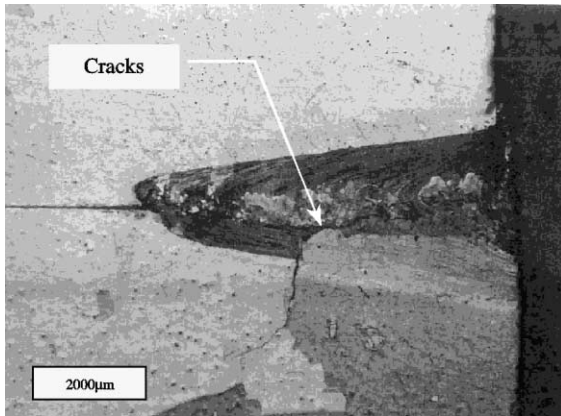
CuCrZr–CuCrZr EB welded seam.
